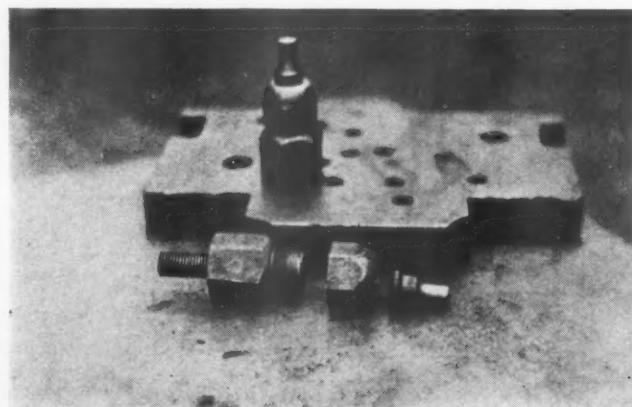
Punch-holding base plate which is fastened to the machine slide
